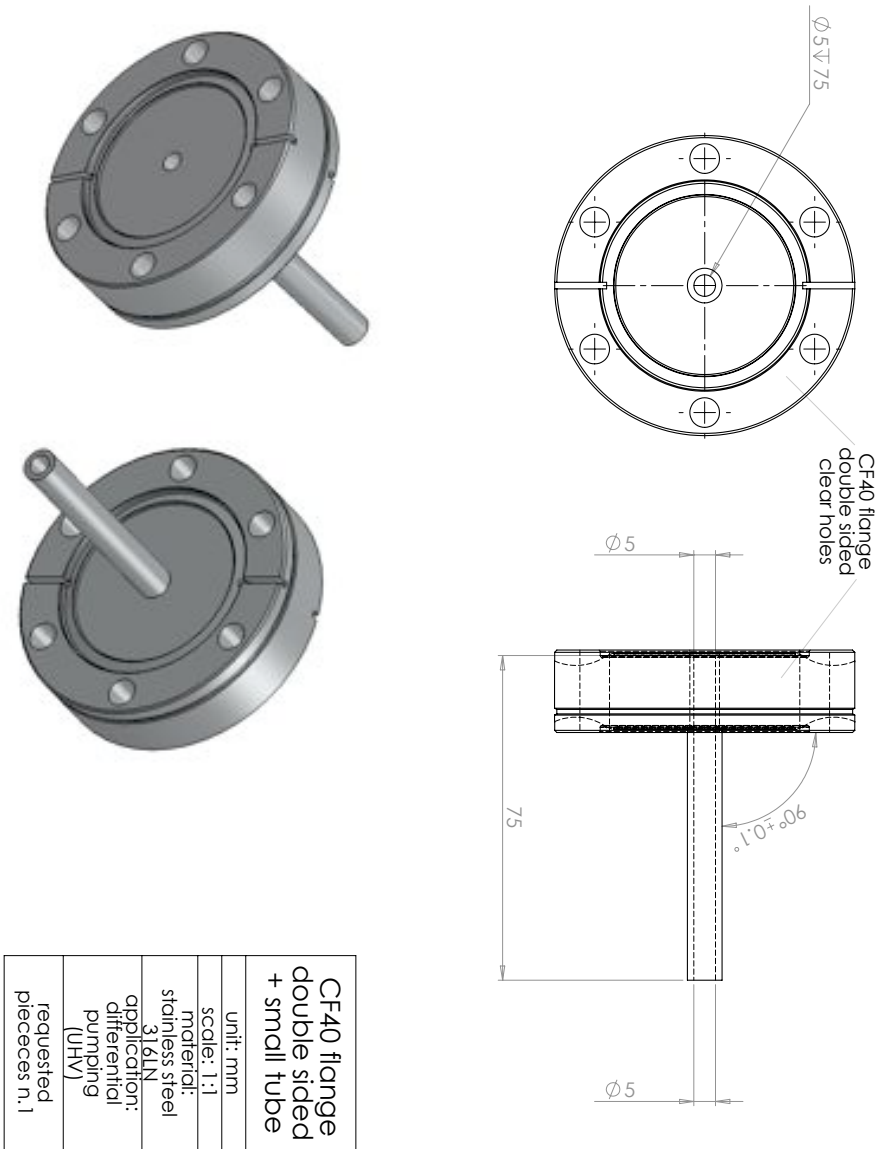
Double sided CF40 flange with tube for differential pumping.
